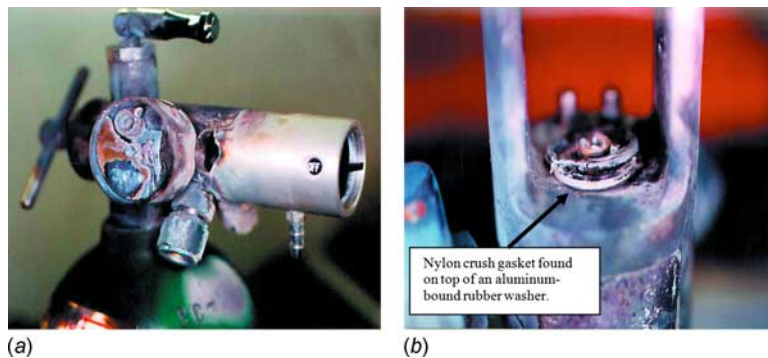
(a) Fire-damaged regulator; (b) inlet sealing.
